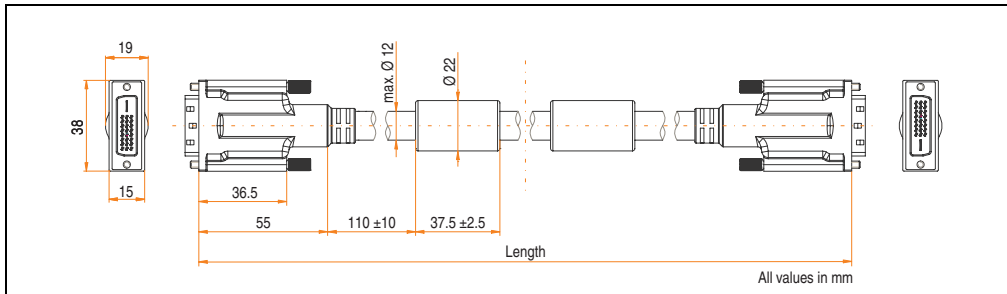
Dimensions - SDL cable 5CASDL.0xxx-03
